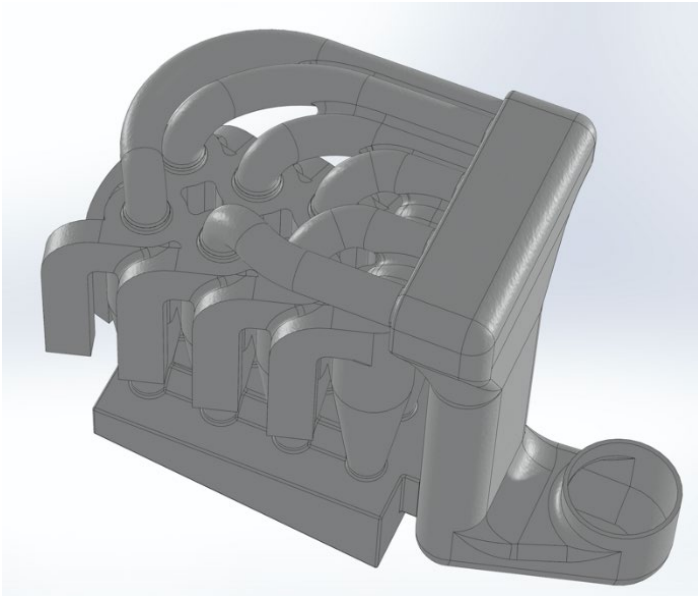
Illustration of 8-Chamber Multi-Cyclone Block (part of Cyclone & Tray Assembly)
